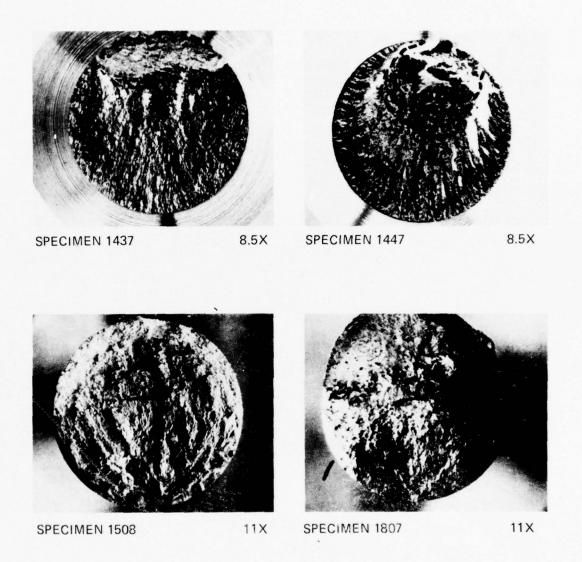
Fatigue-Fracture Surface and Origin of Failure for Specimens 1437, 1447, 1508, and 1807.
